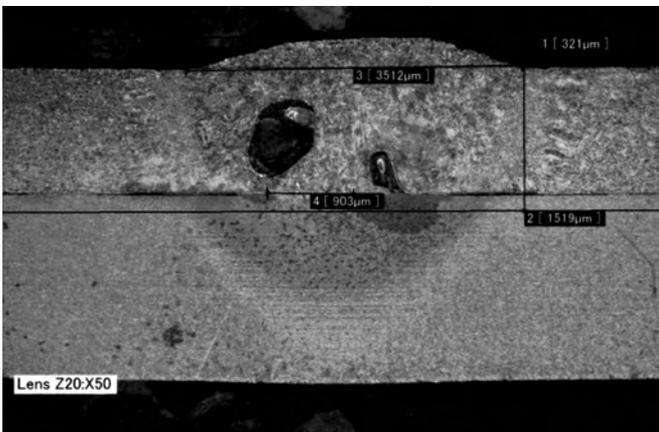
Picture of weld without gap, with 4 mm defocus.
